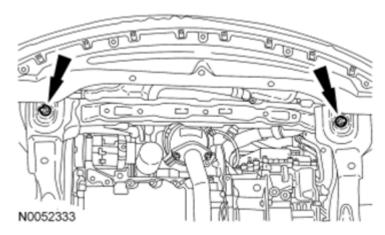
Locating Front Subframe Nuts Courtesy of FORD MOTOR CO.
